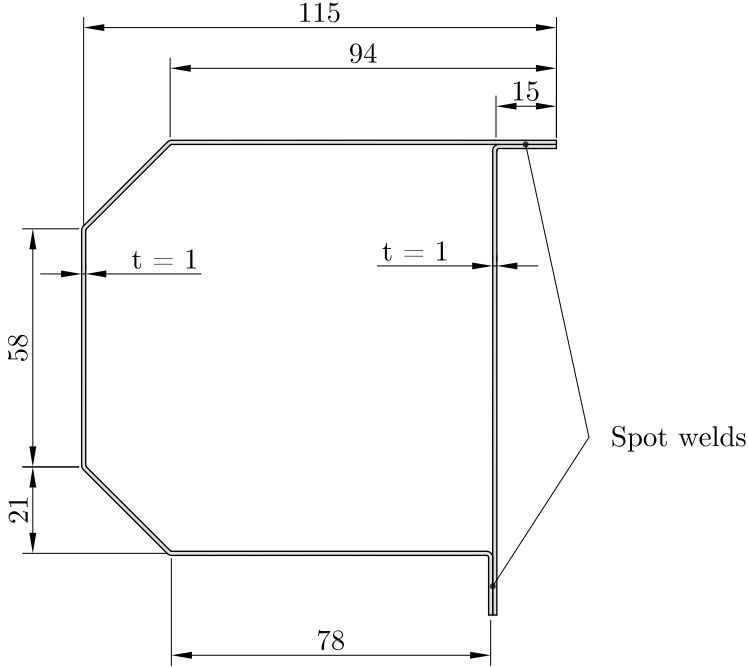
Dimensions of the steel box cross-section, in millimeters.
